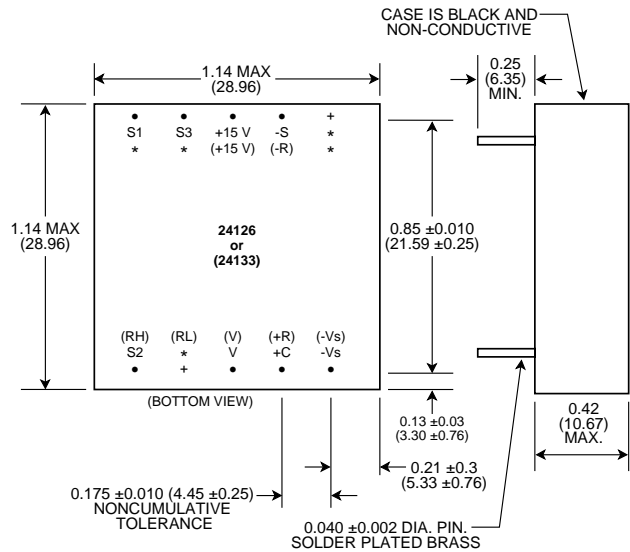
B. TRANSFORMER MECHANICAL OUTLINES
